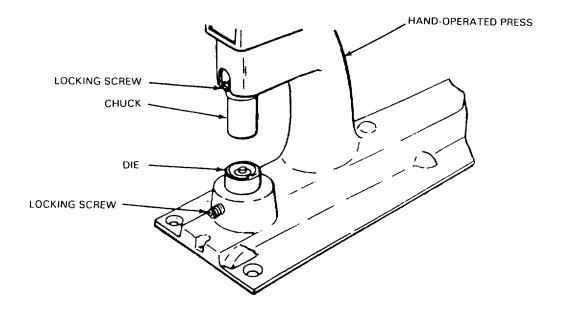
Chuck and Die Installed in Hand Operated Press.
